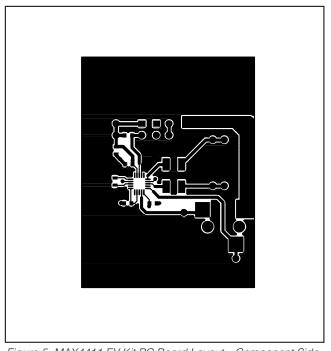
MAX4411 EV Kit PC Board Layout—Component Side
